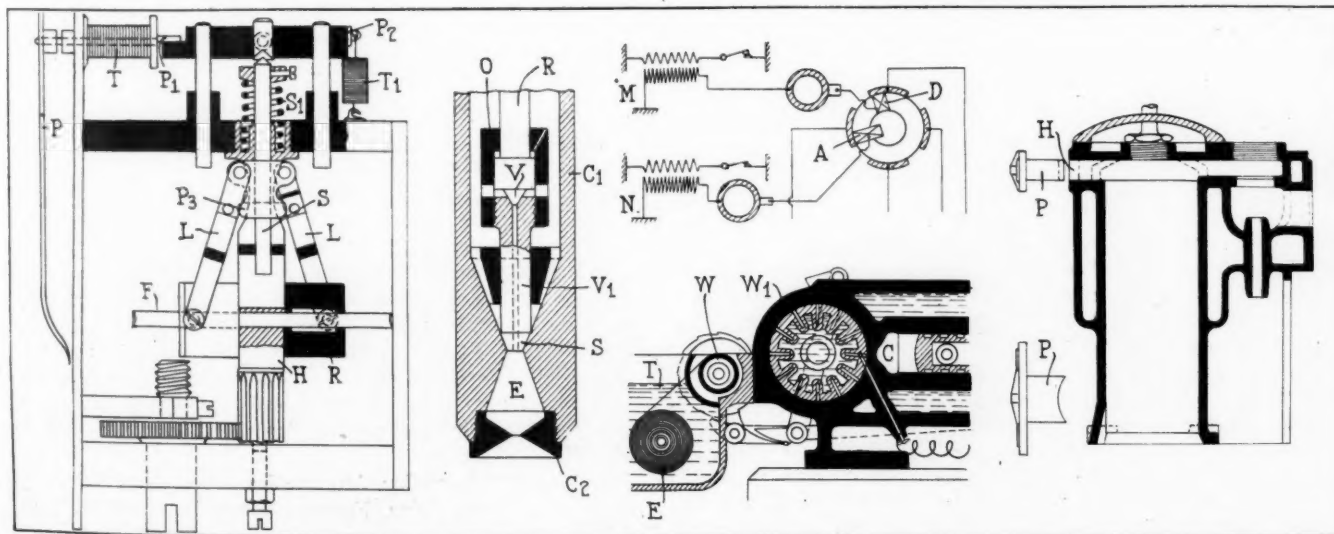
Robinson centrifugal speedometer. Fig. 10—Breuer fuel admission device. Fig. 11—Bosch two-magneto ignition. Fig. 12—Thorn explosive motor. Fig. 13—Wingfield cylinder-cleaning design
